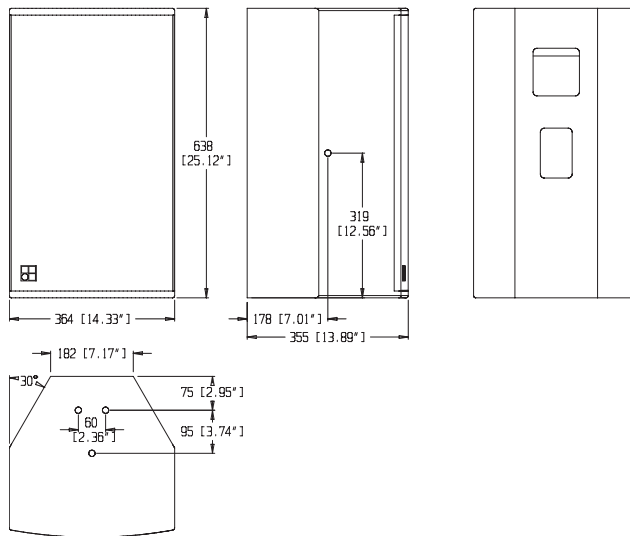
Cabinet dimensions Ci45/Ci60/Ci90 in mm [inch]
